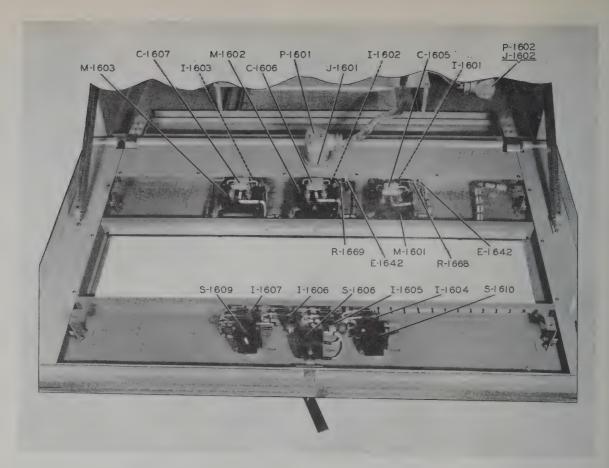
Power Supply Assembly PP-1089/FRT-22, Upper Front Panel, Rear View.
